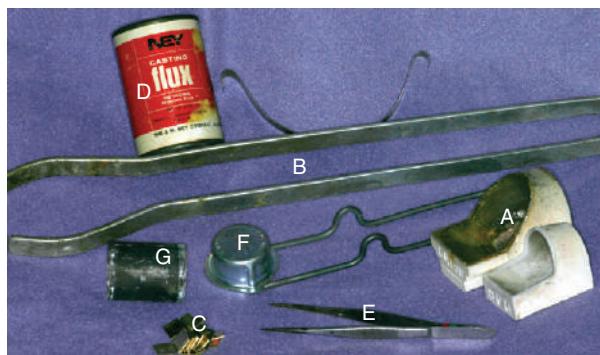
Casting armamentarium. A, Crucibles; B, tongs; C, casting alloy; D, flux; E, tweezers; F, lighter; G, casting ring.
